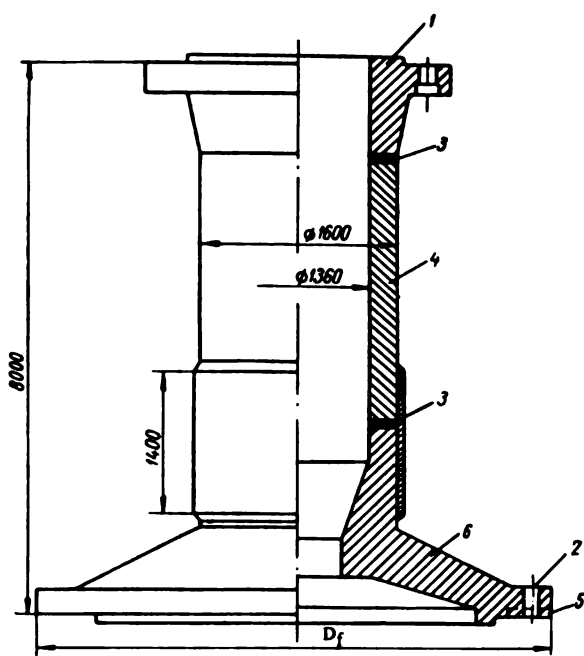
Welded shaft, $d_s = 1600$ mm
